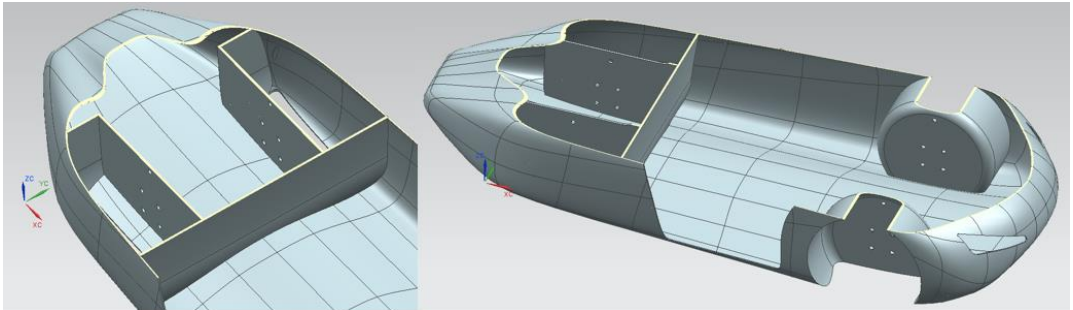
Shows inner walls behind bulkhead to mount suspension on.
